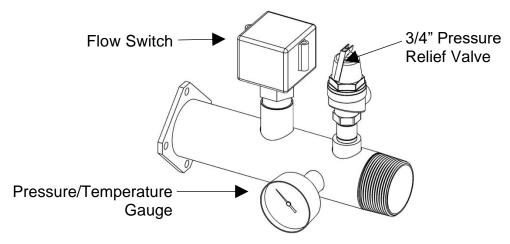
Manifold Assembly and Components for EXT 450 2S, 600 2S, 800 2S & 1100 2S
